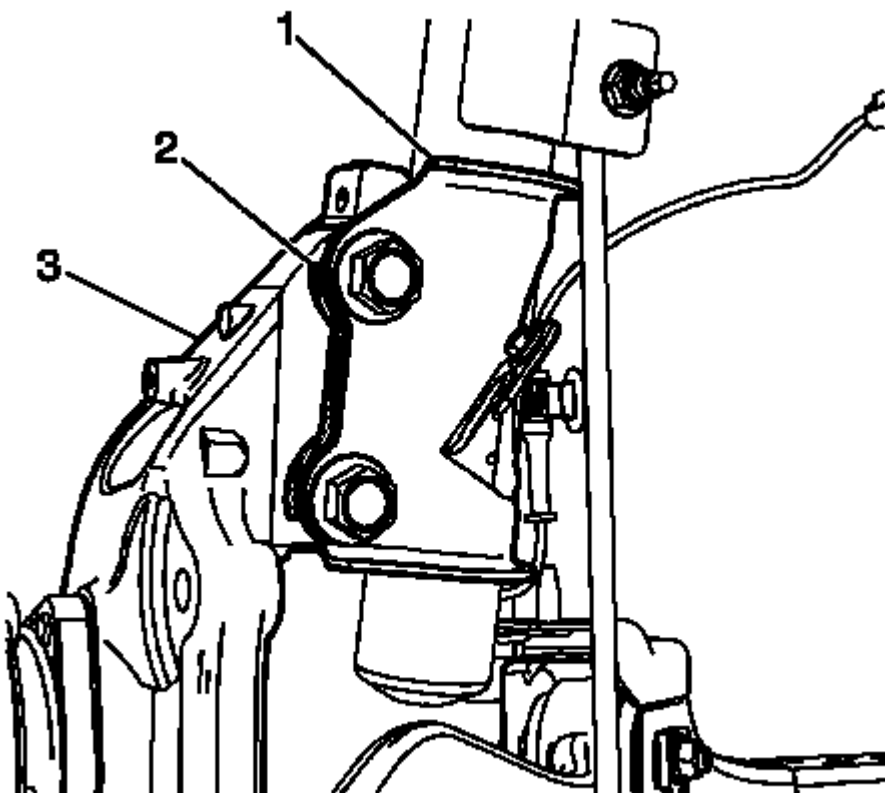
Mark On Steering Knuckle & Strut Assembly
